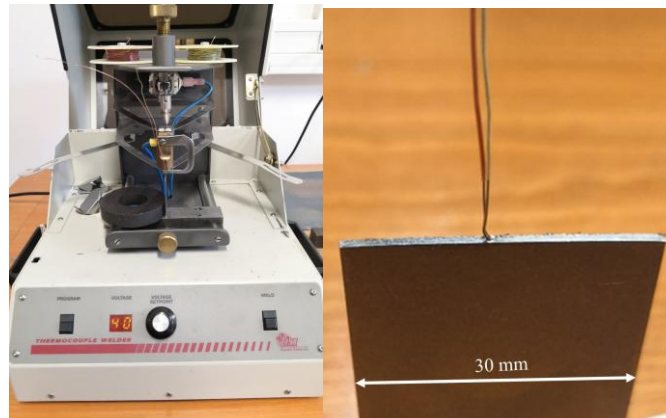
Thermocouple weld device in left and welded micro K-type thermocouple in right
